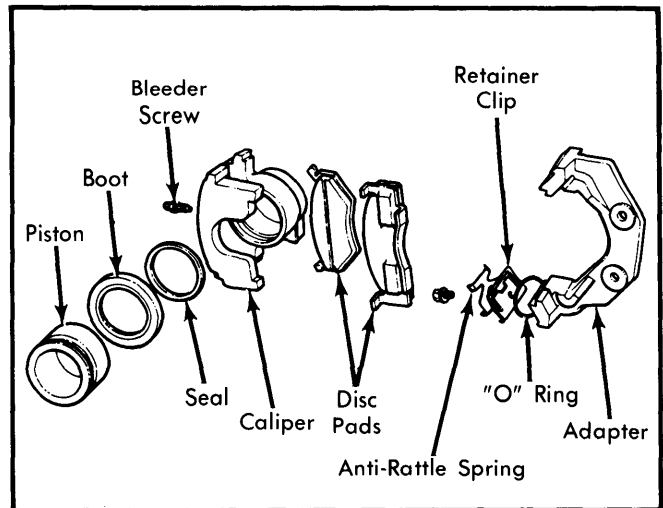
Exploded View of Sliding Caliper Assembly (All Models Except Omni and Horizon)
